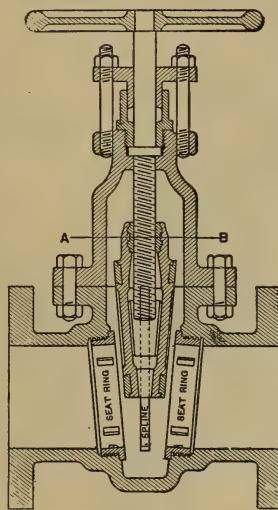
A Typical Gate Valve, Solid-wedge, Bolt-top, Inside Screw.
